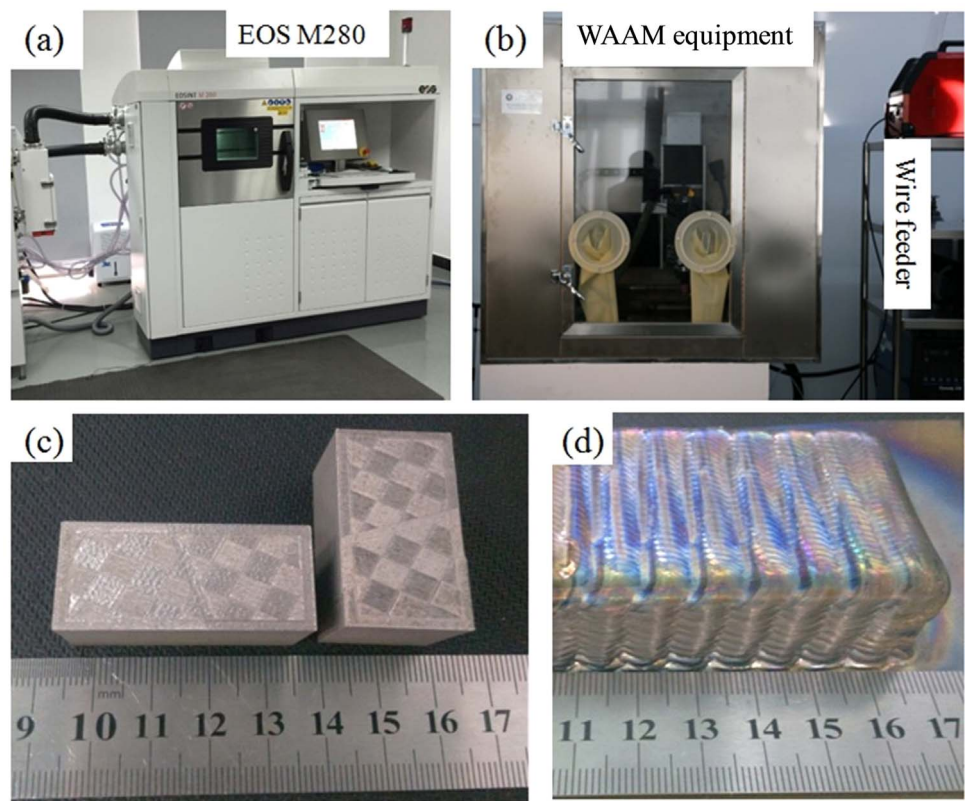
(a) SLM experimental equipment; (b) WAAM experimental equipment; (c) As-built samples produced in SLM; (d) As-built samples produced in WAAM.
